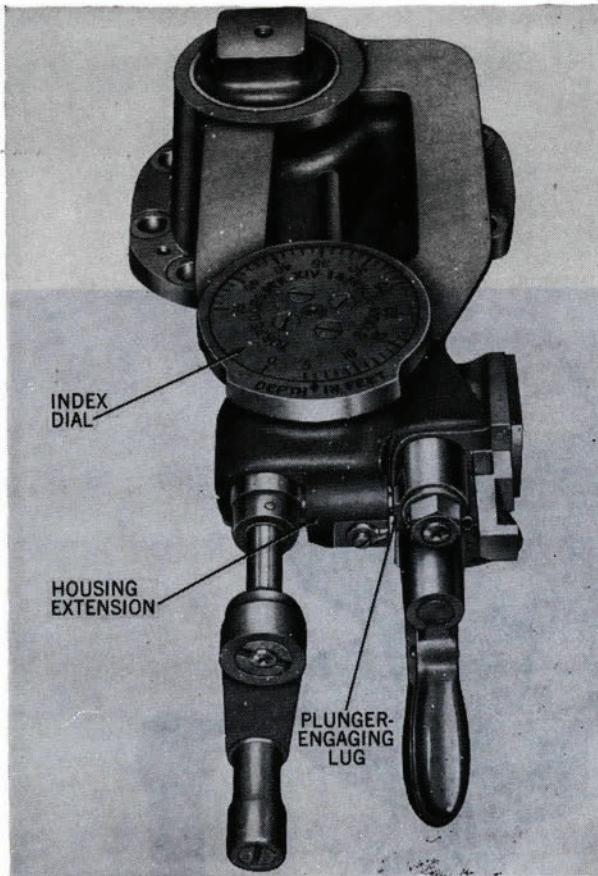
Depth Setting Mechanism—Left-Hand Tube—Making Depth Setting.
